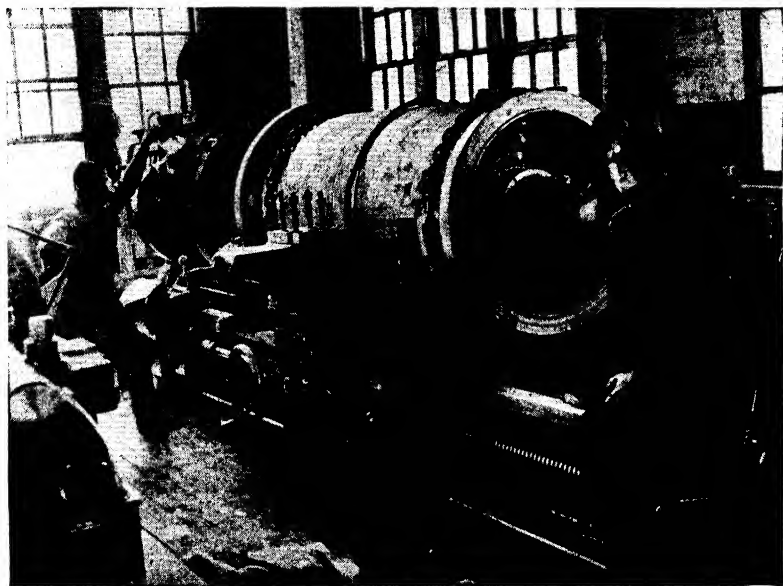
Boring lines for Diesel-engine cylinders with a three-tool head.
